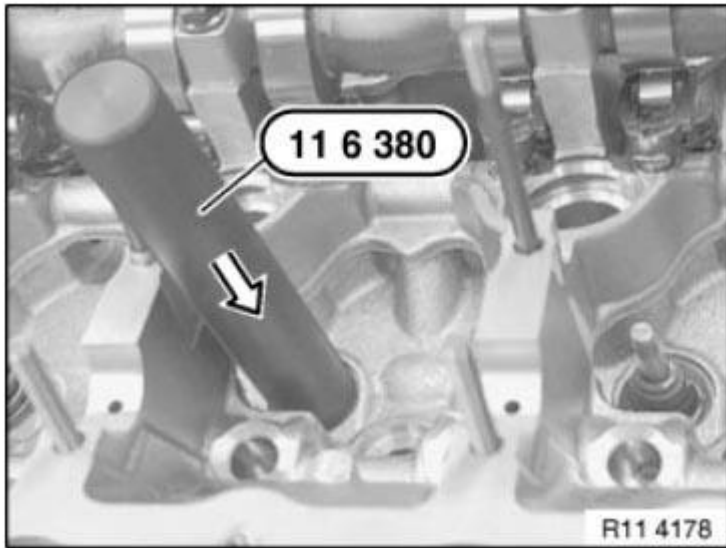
Pressing Valve Stem Seal Using Special Tool 11 6 380
